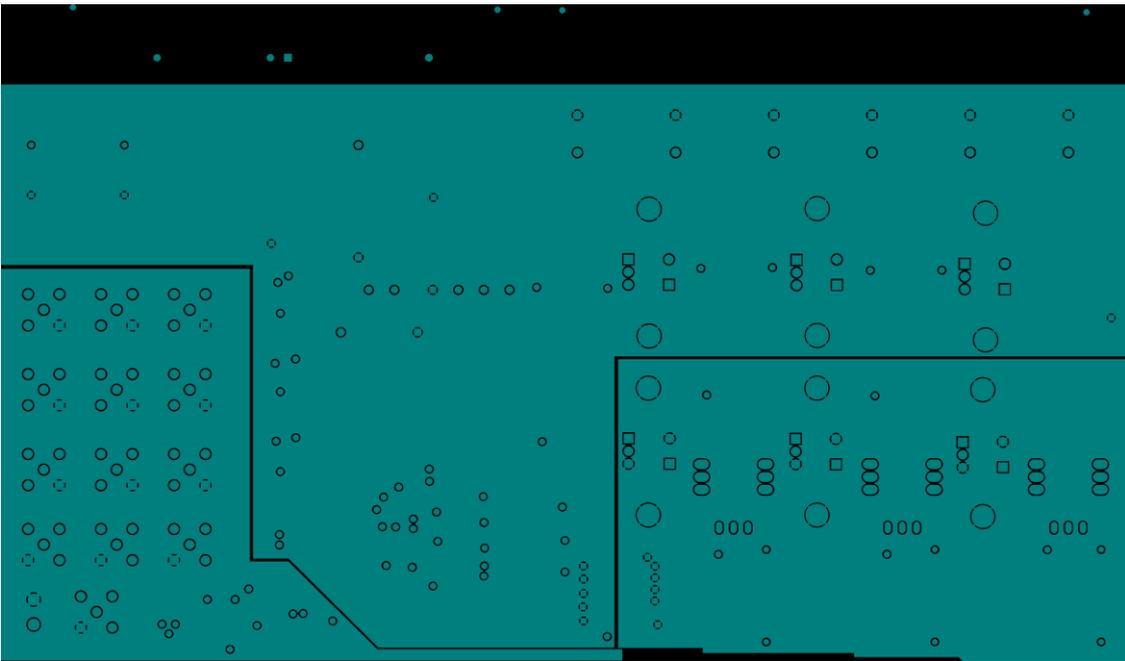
The fourth PCB layer of the three-phase inverter.
